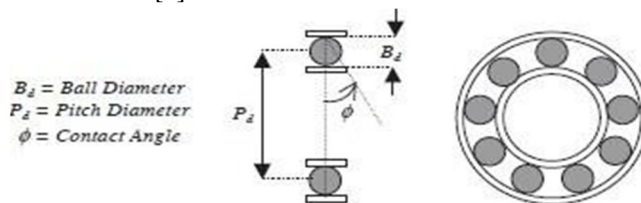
Ball Bearing construction Based on the component that is affected, there are four main types of bearing problems that can develop in bearings: ▪ Outer-race flaw
